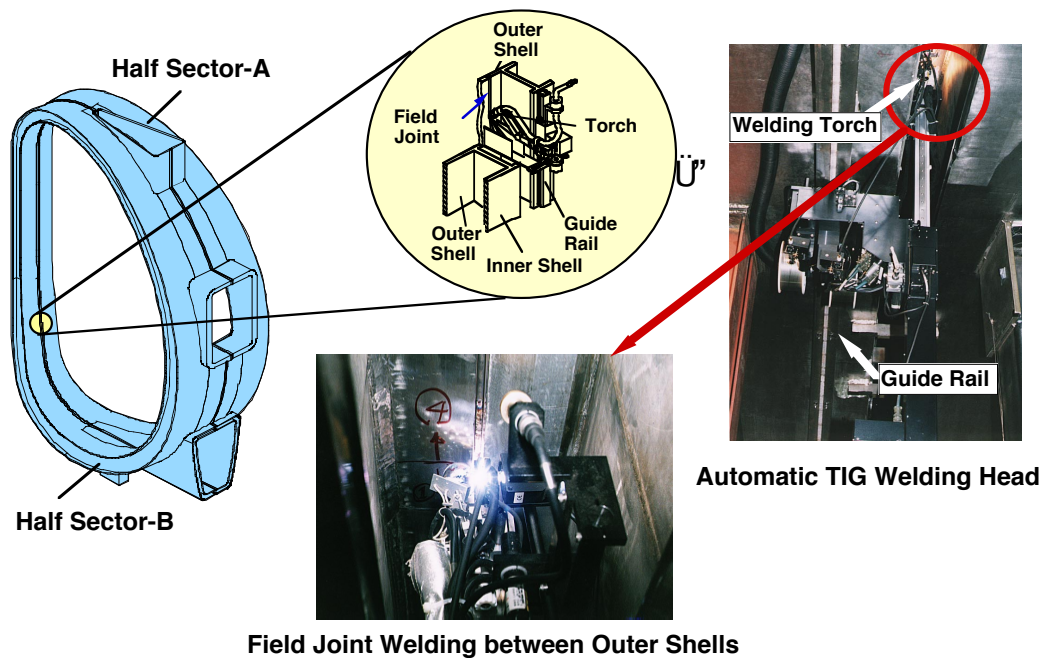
Field Joint Welding Test of VV Sector Model
